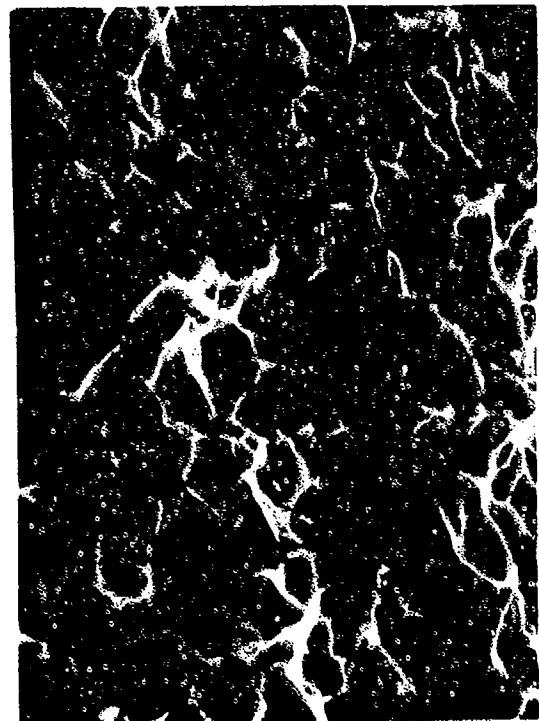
Overall photograph of the fracture surface.
